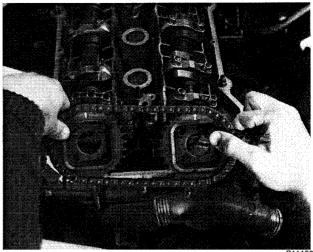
Primary timing chain sprocket correctly aligned to exhaust camshaft. Elongated sprocket holes should be aligned to left side of threaded camshaft holes.
